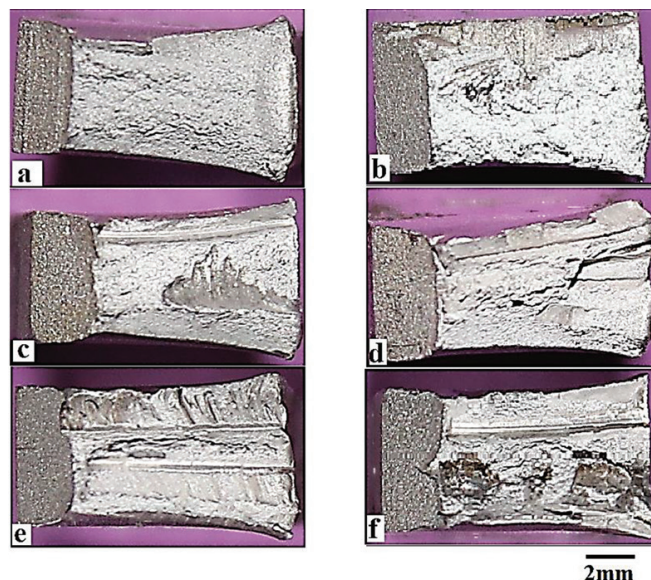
Macroscopic photographs of fracture surfaces of the impact test specimens. (a) 'Base', (b) 'simple weld', (c) 'simple weld + FSP', (d) '0.75 + FSP', (e) '1.5 + FSP', and (f) '2.5 + FSP'. The lateral expansion and fibrous appearance indicate that the fracture mode is ductile
